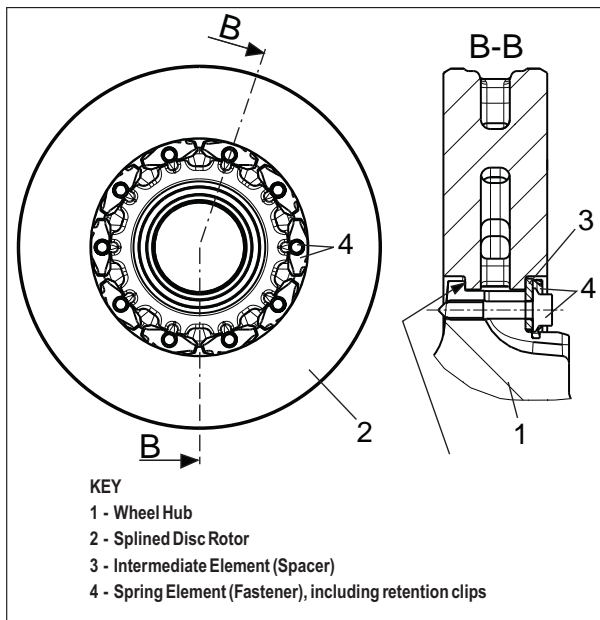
ROTOR WITH CROSS-SECTION VIEW
